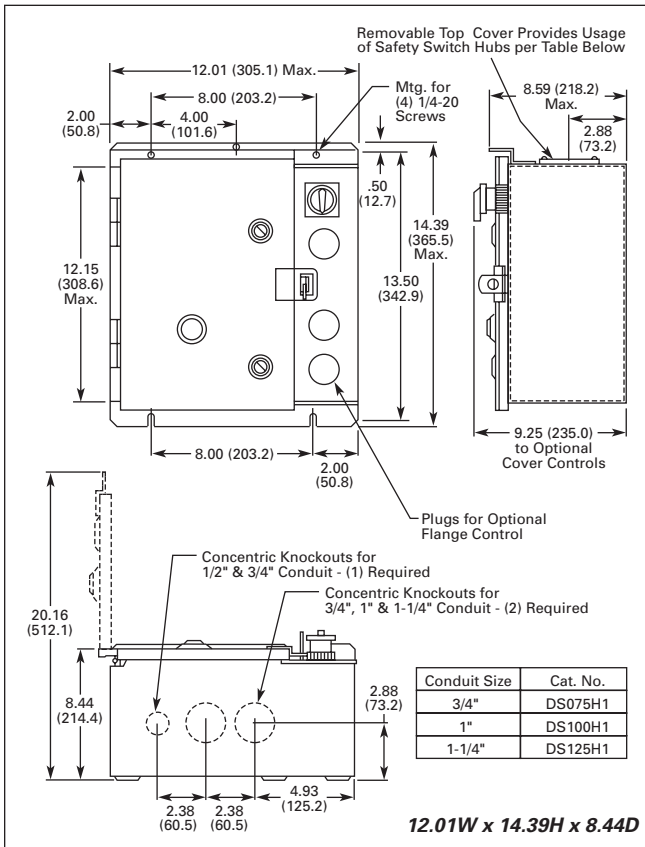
Box 6A, Type 3R — Approximate Dimensions in Inches (mm)
